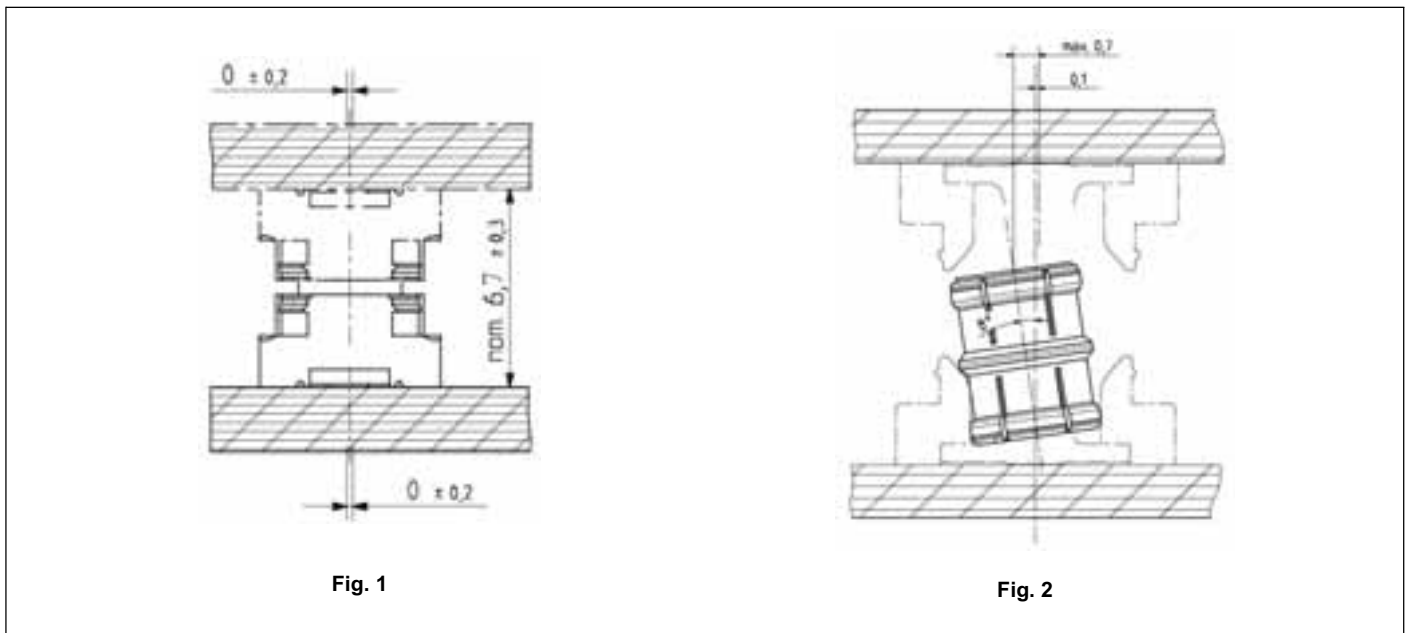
Moreover, these connectors allow axial misalignment of 0.6 mm with a nominal value of 6.7 mm and radial misalignment of 0.4 mm easing connectors assembly.
